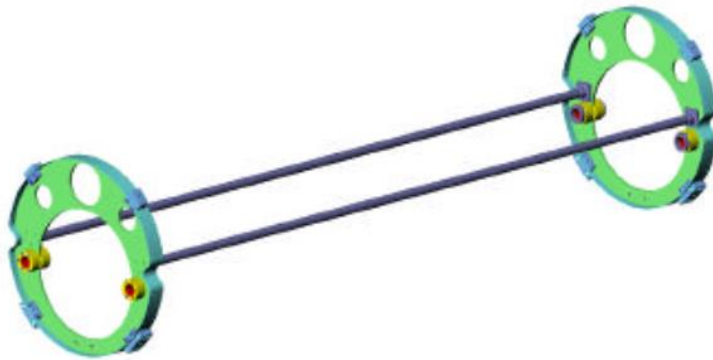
Suspension System Assembly. (T. H. Nicol et al.)
